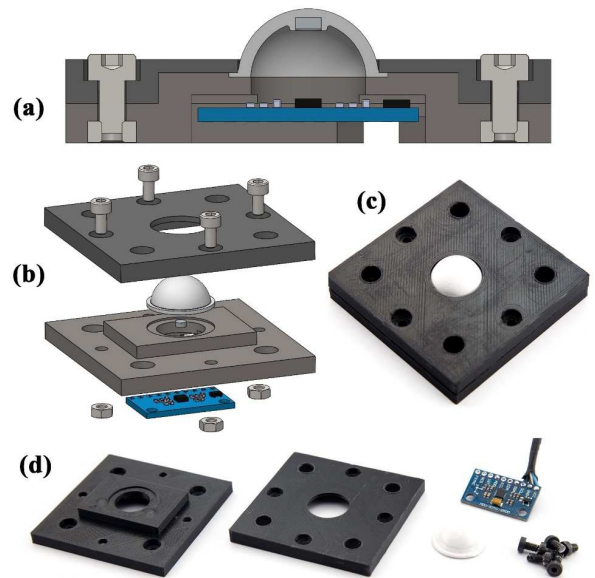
(a) CAD cross-section of the sensor, (b) Exploded view of the CAD sensor, (c) Assembled prototyped sensor with 3D-printed parts, (d) 3D-printed parts and Hall-effect sensor.
